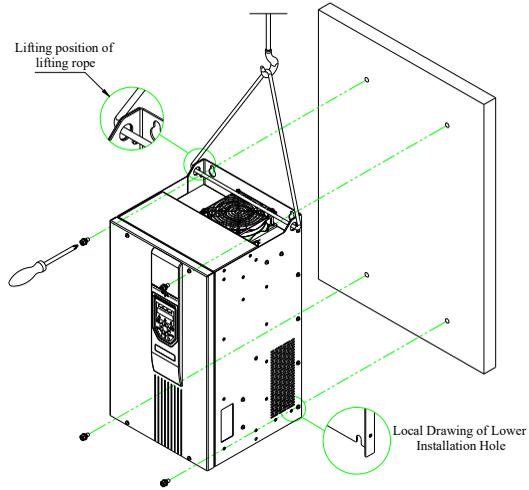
Wall-mounted Type Hope530G45T4~Hope530G375T4 Models
